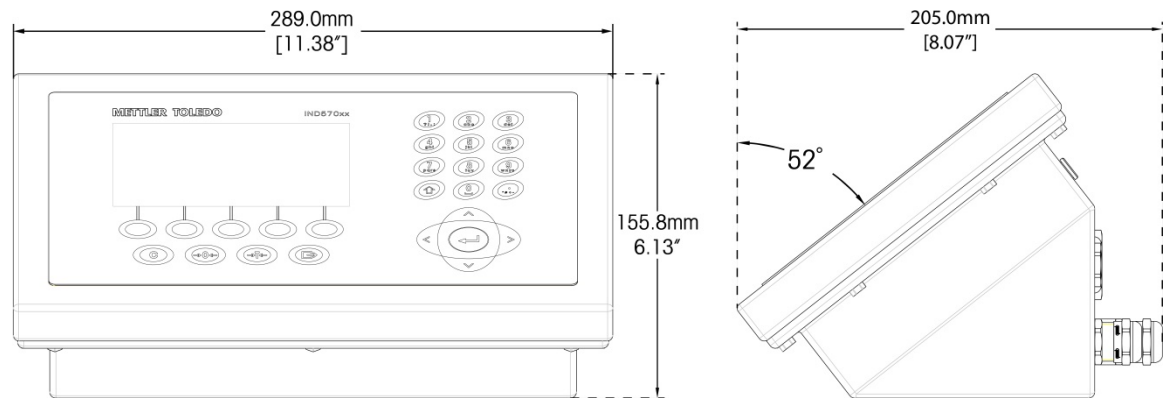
Harsh Environment Enclosure Dimensions, IND570xx
